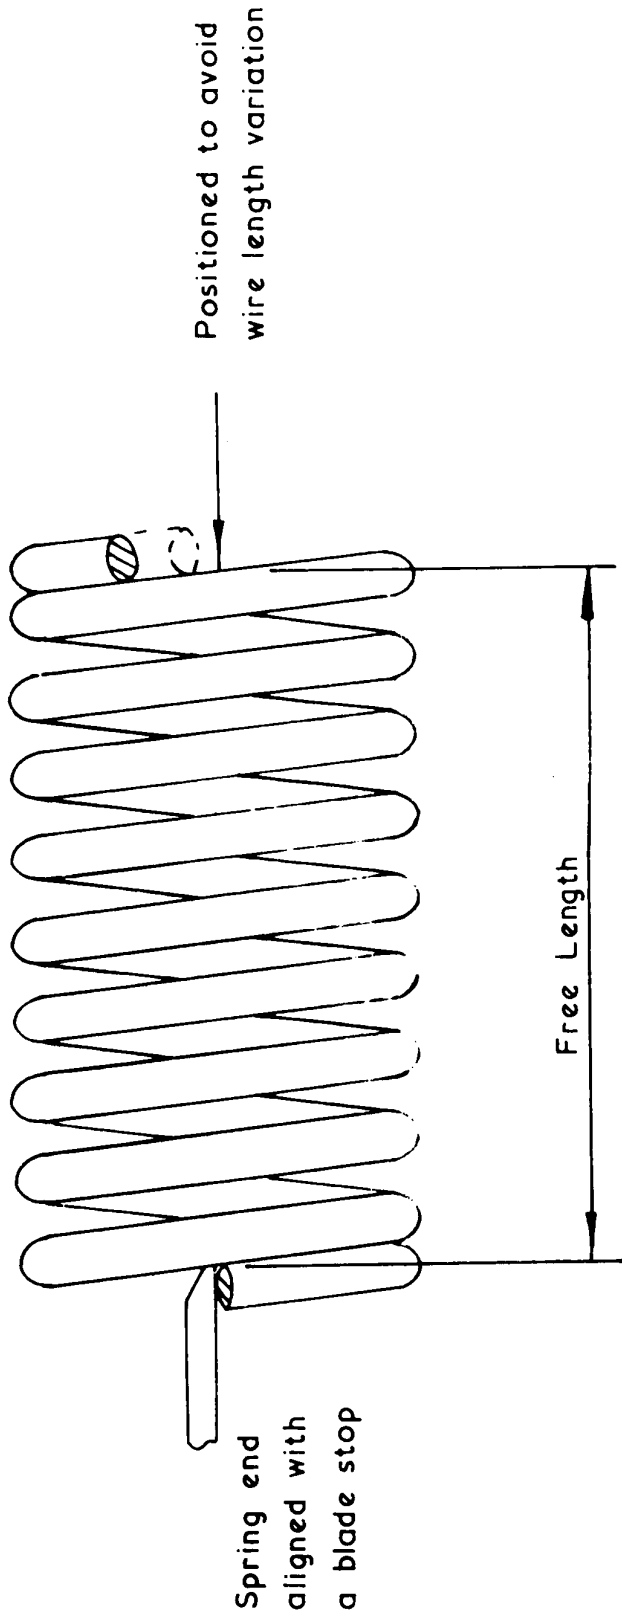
METHOD OF LOCATING SPRINGS FOR MEASURING
